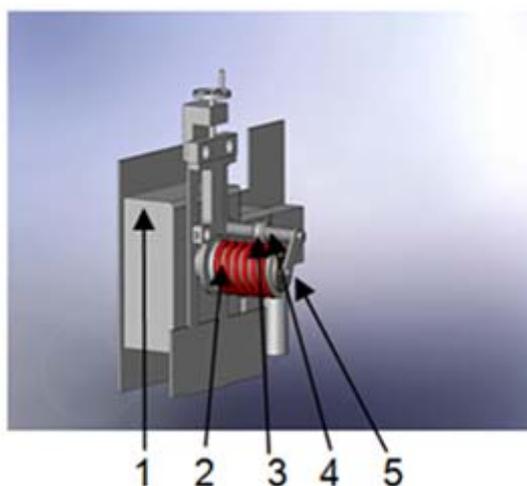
Instalation for the manufacture of coil springs: 1. drum rotation mechanism; 2. coiled spring; 3. driving roller; 4. screw for the driving roller; 5. drum winding
